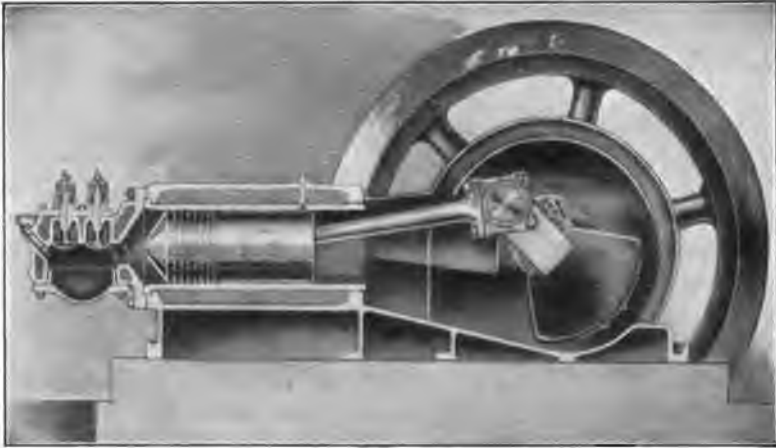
Cylinder with removable liners De La Vergne D.H. low compression oil engine.
